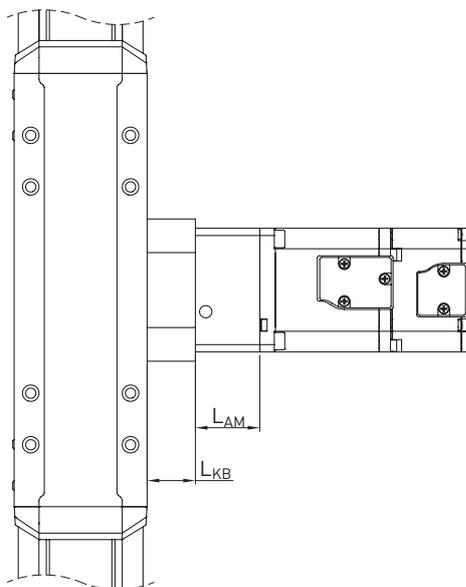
Cantilever axis HC-B motor connection without gears
